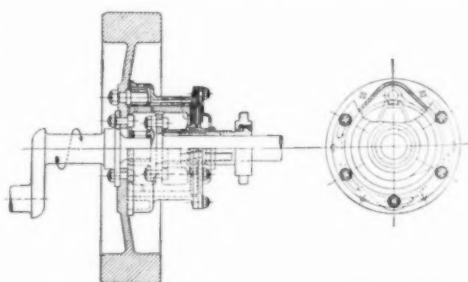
IMPROVED COIL CLUTCH, FOR MOTOR CARS.
